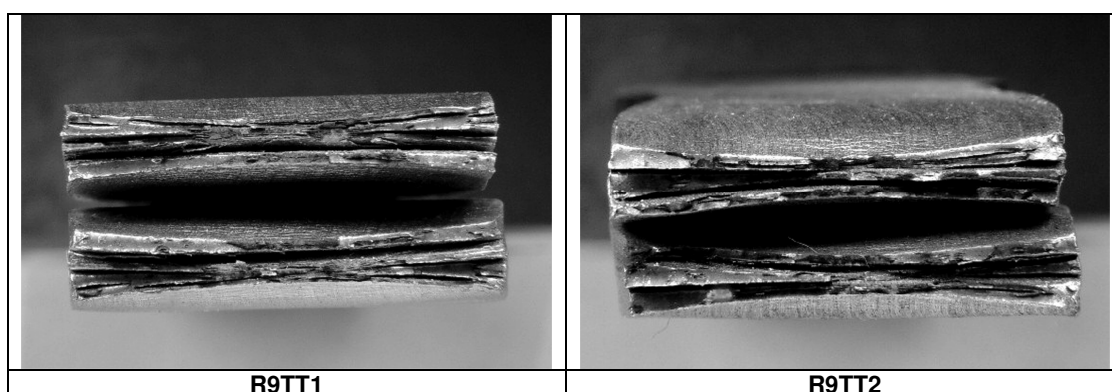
Fractographs of R9TT1 and R9TT2 specimens.
